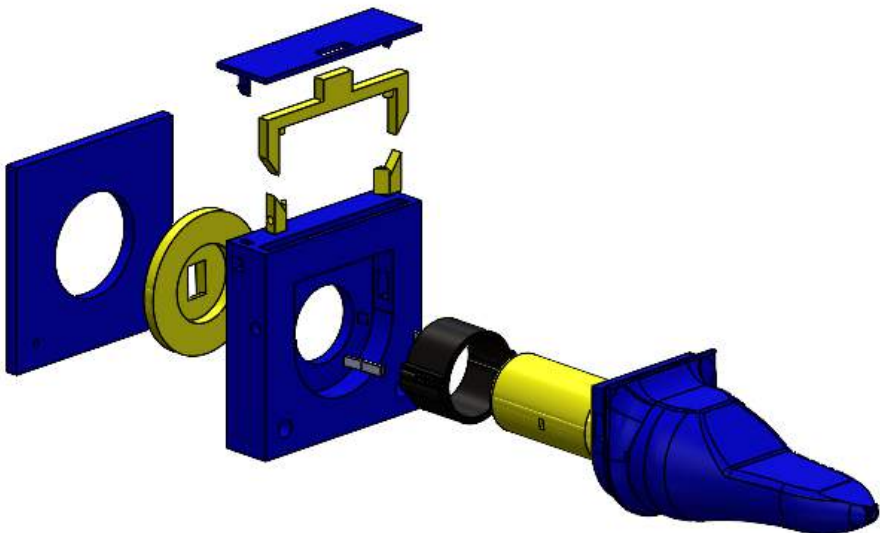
Exploded view CAD model prototype of connector 4. The blue components are stationary, while the yellow components are intended to be rotary.
